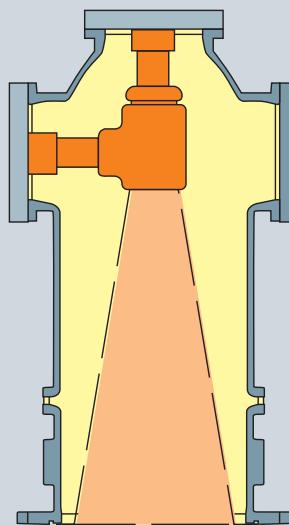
Cable termination module: cable termination modules conforming to IEC are available for connecting the switchgear to high-voltage cables. The standardized construction of these modules allows connection of various cross-sections and insulation types. Parallel cable connections for higher rated currents are also possible with the same module.
